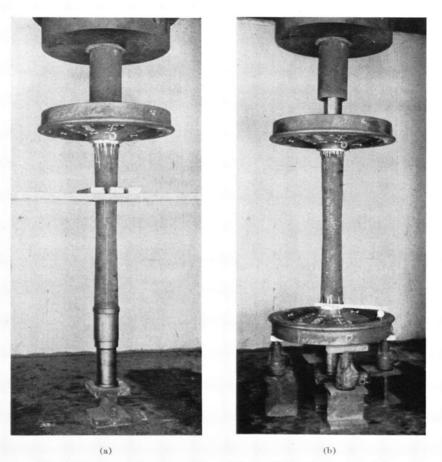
MOUNTING PROCEDURE; UPPER WHEEL BEING PRESSED ON AXLE (The jacks on the lower wheel were used only to prevent the assembly from toppling over.)
